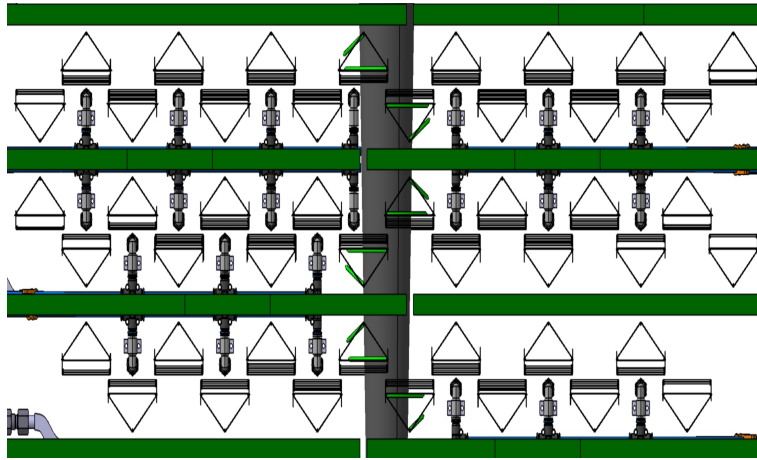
Top view of the STS ladder assembled on the C-frame with perforated tubes blowing the cold air
